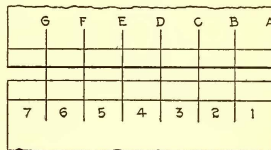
METHOD OF BACK-STEP WELDING
